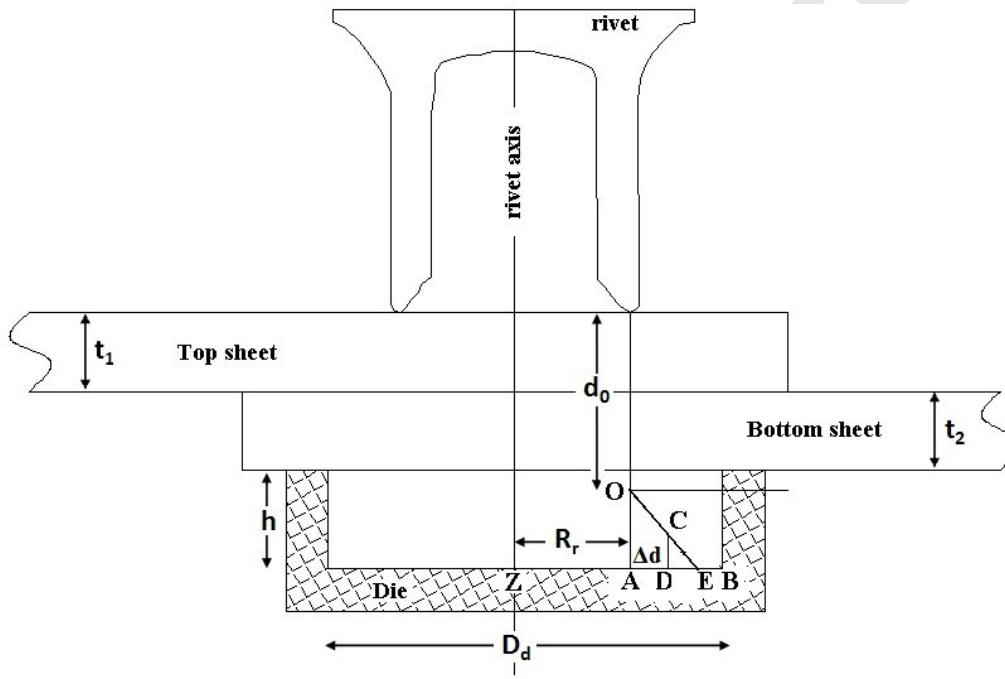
Geometrical model of rivet flaring calculation, where Δd (distance AD) is the rivet flaring
